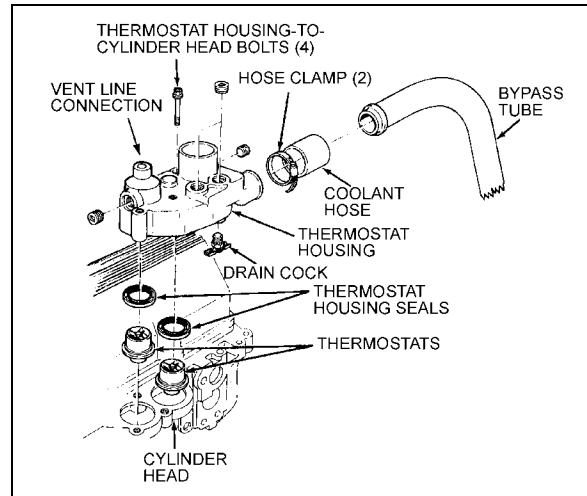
THERMOSTAT AND RELATED PARTS 05034
